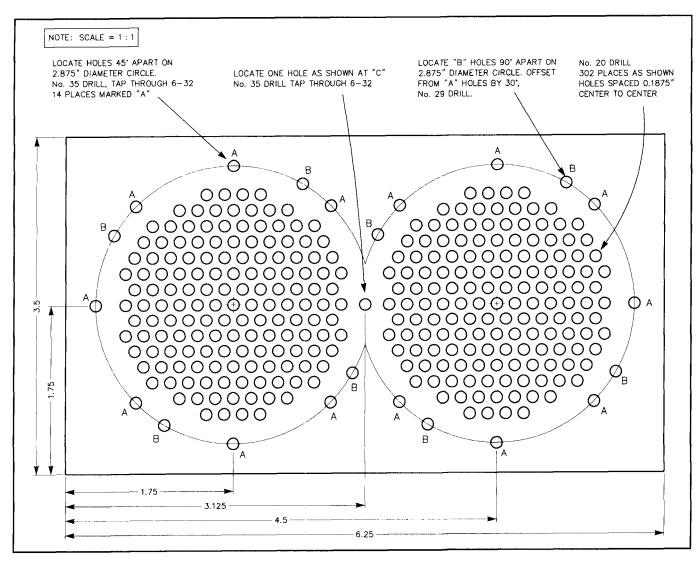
Air-outlet plate is made from 3/8-in. 6061-T6 aluminum plate. See the text and the caption for Fig 16 for details on drilling the hole pattern.
